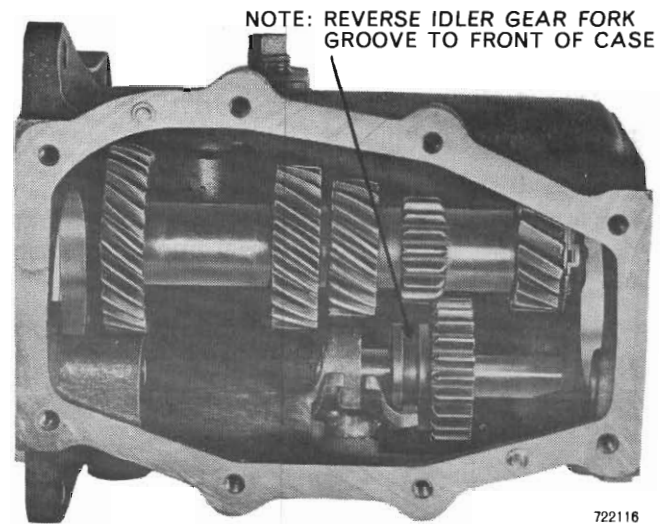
Cluster and reverse idler gear— assembled condition.
